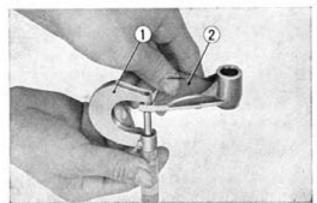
(i) Micrometer (2) Gear shift fork
